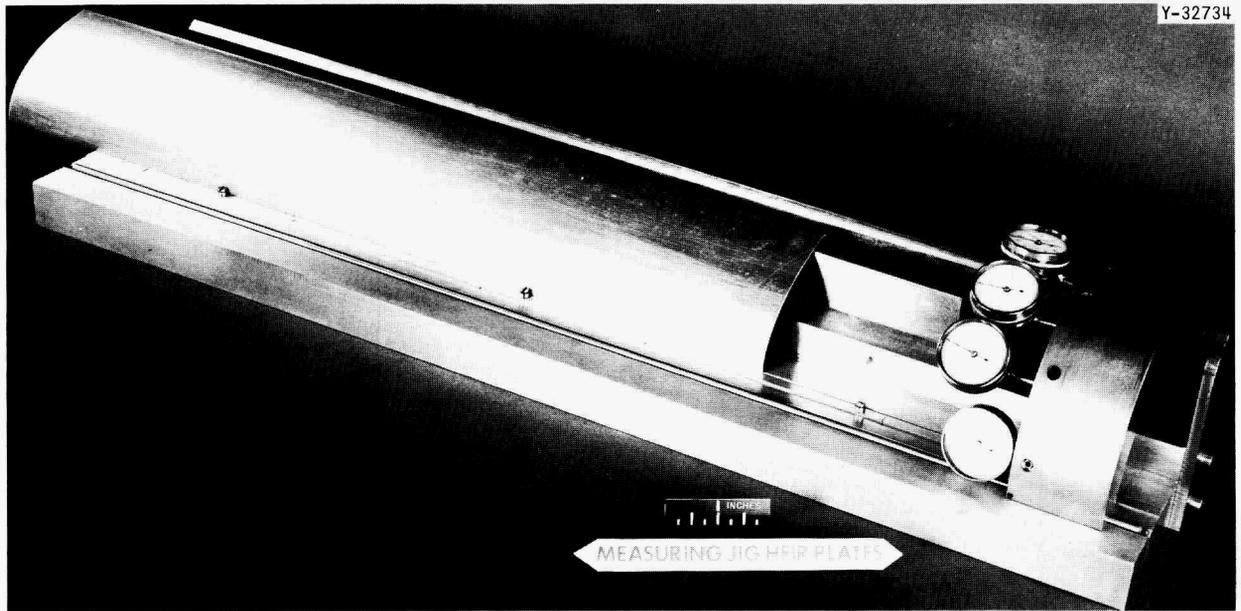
Jig for Measuring Shape of HFIR Fuel Plates.
